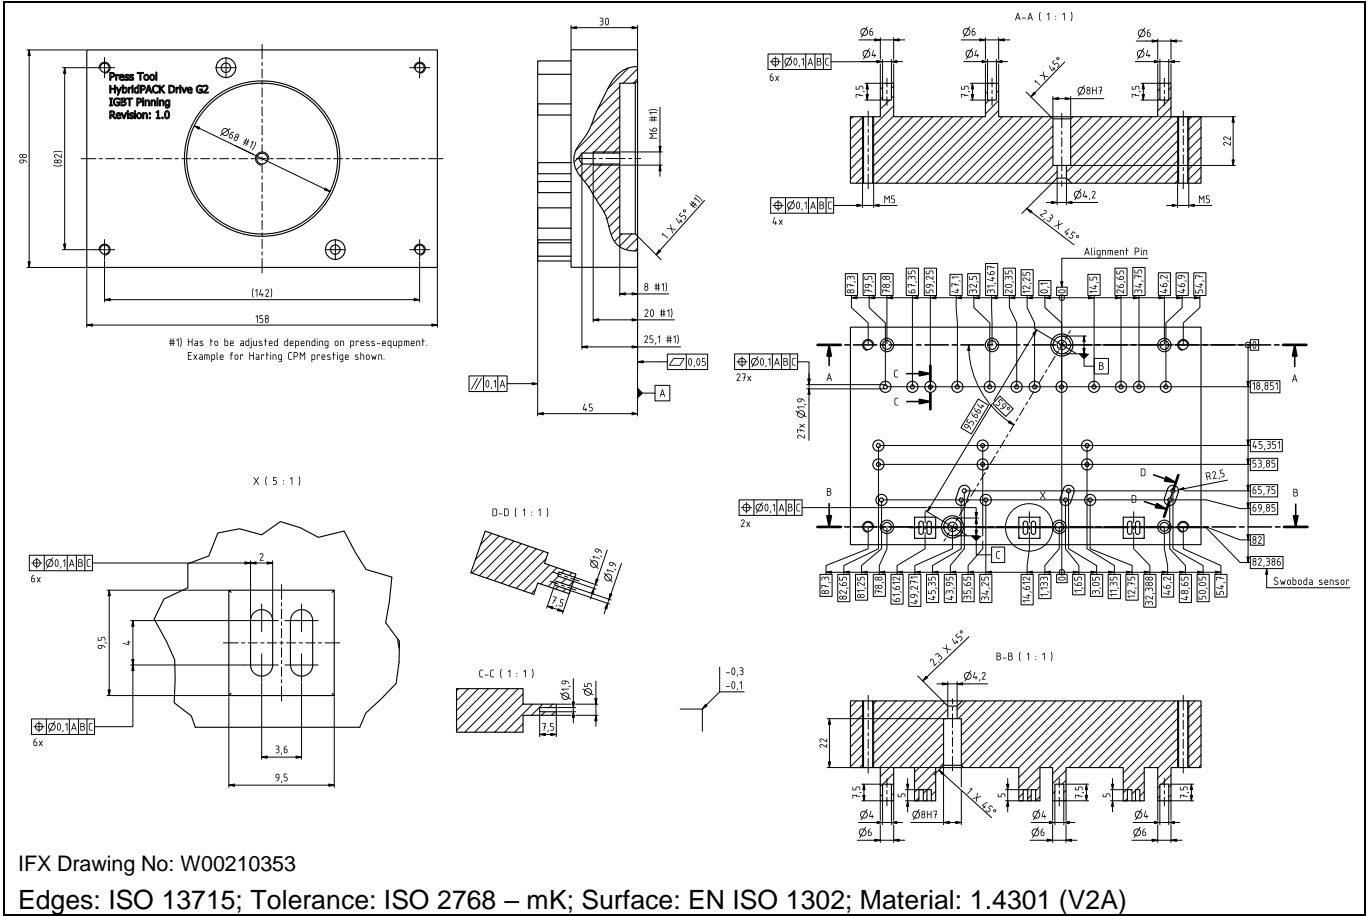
Technical drawing of the sample press-tool IGBT signal pinning (top tool).
